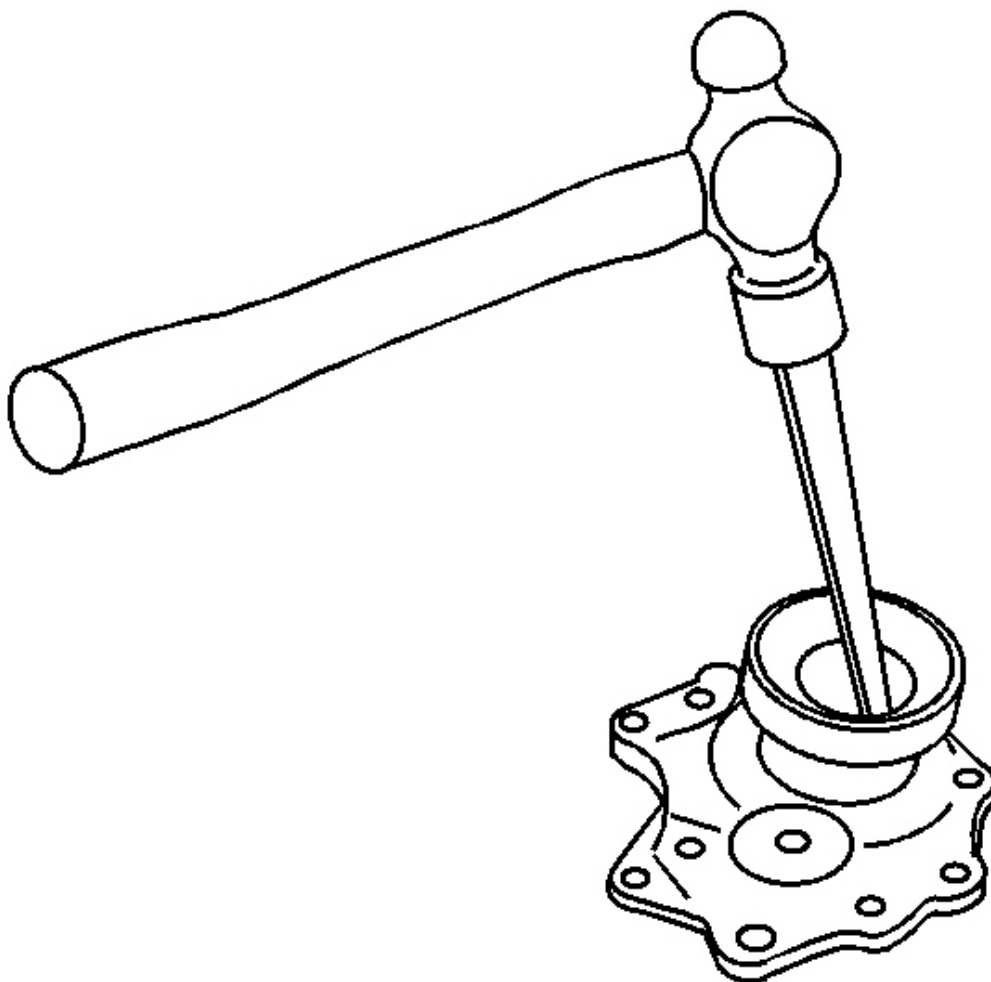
Removing Inner Bearing From Outer Intermediate Shaft Bearing Case Half
